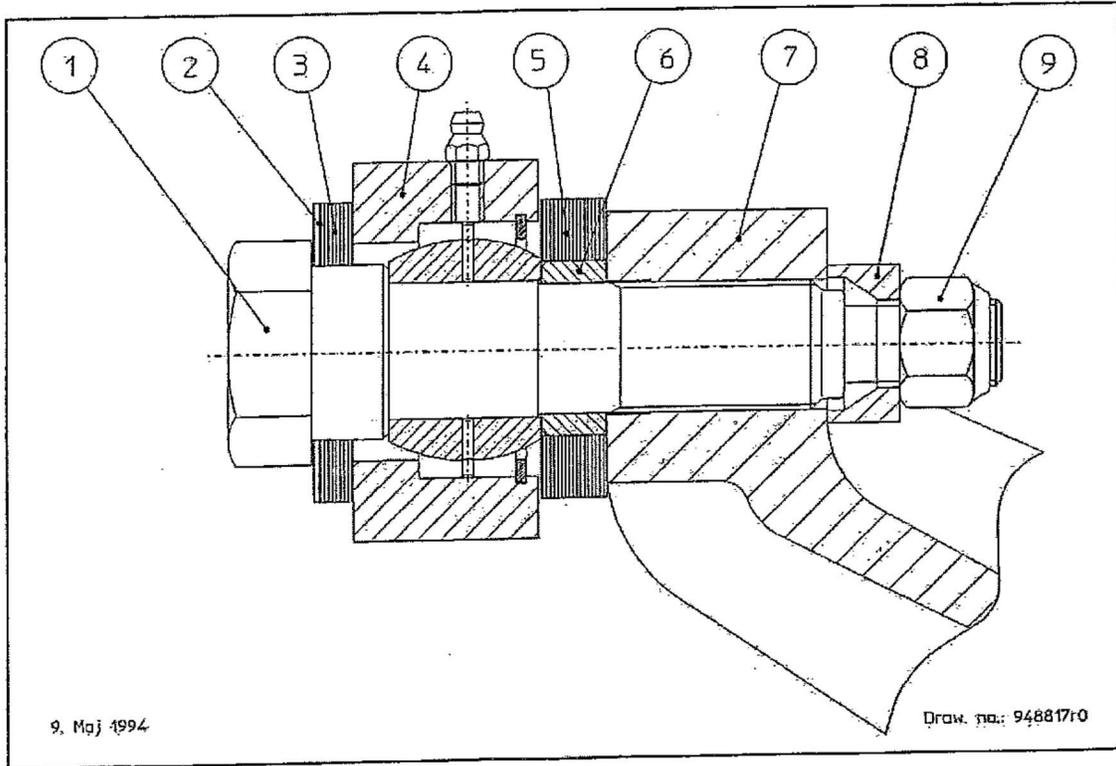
Spare parts drawing, shaft, connecting rod crank
